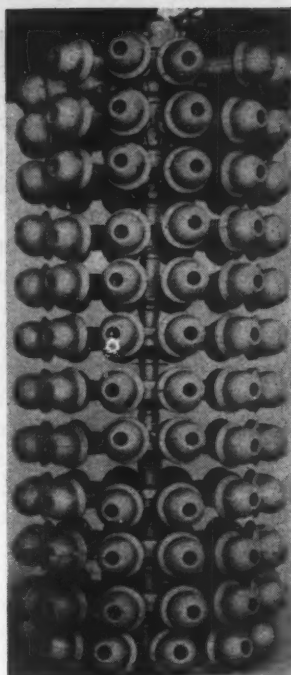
Centrifuged castings—spring bearing for universal carrier.
